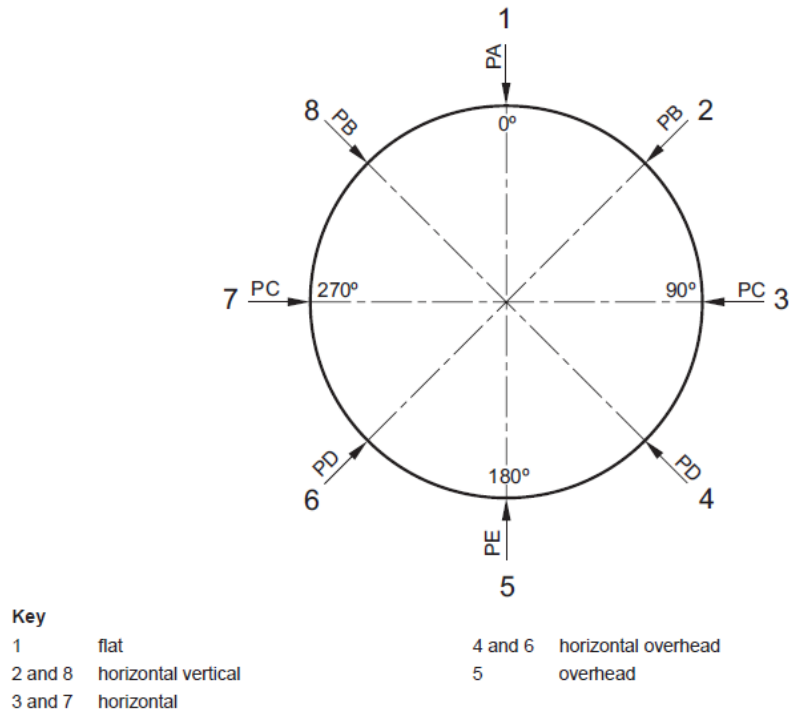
Main welding positions according to BS EN ISO 6947:2011 [5]
